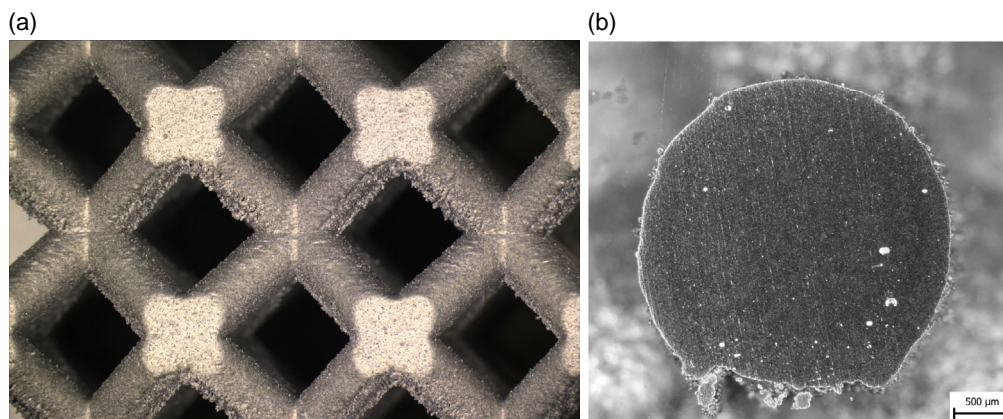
BCC0.3 specimen a) front view and b) cross section of a strut.
